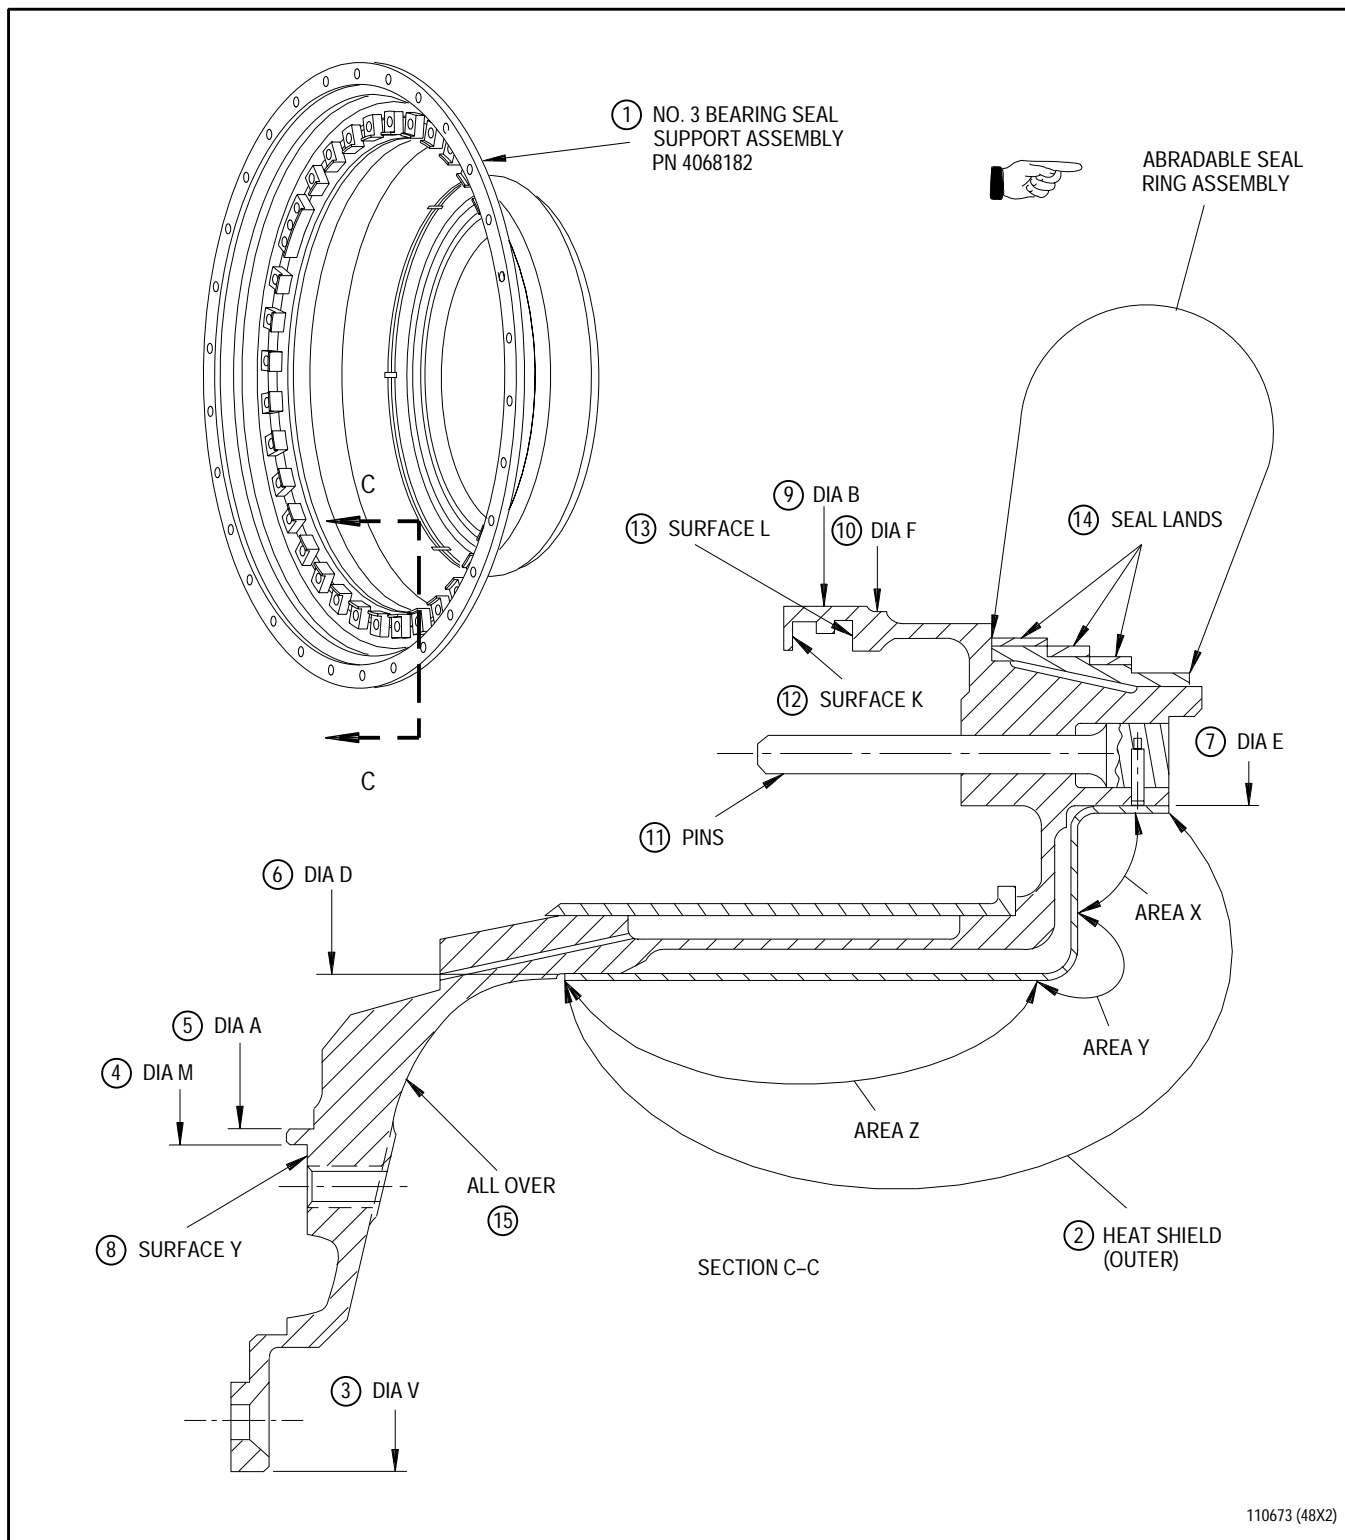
No. 3 Bearing Seal Support Assembly - Inspection (Sheet 1 of 2)
